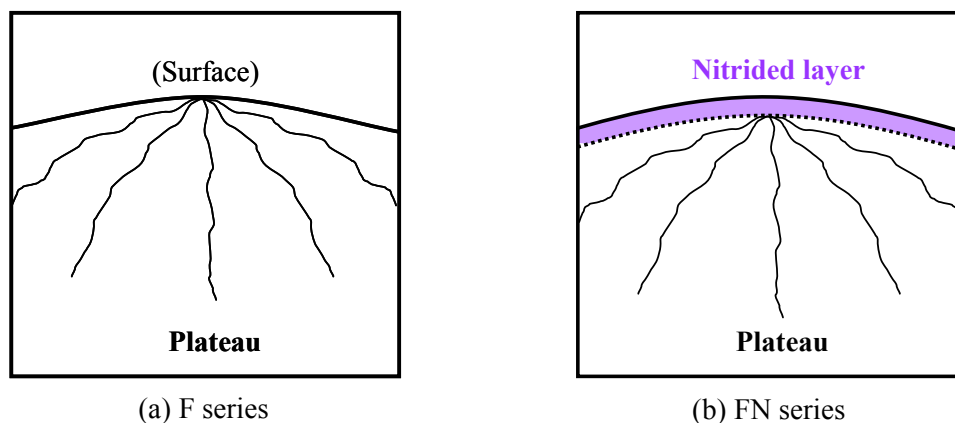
Schematic illustration of fracture surfaces of the F series and the FN series
